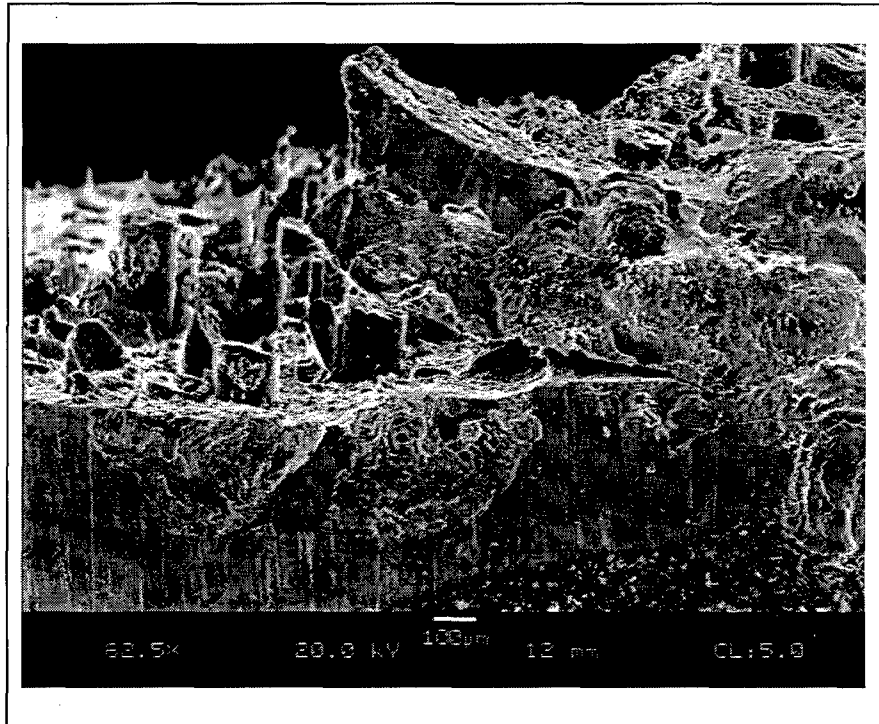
Welding Effect (Surface crack initiated)
